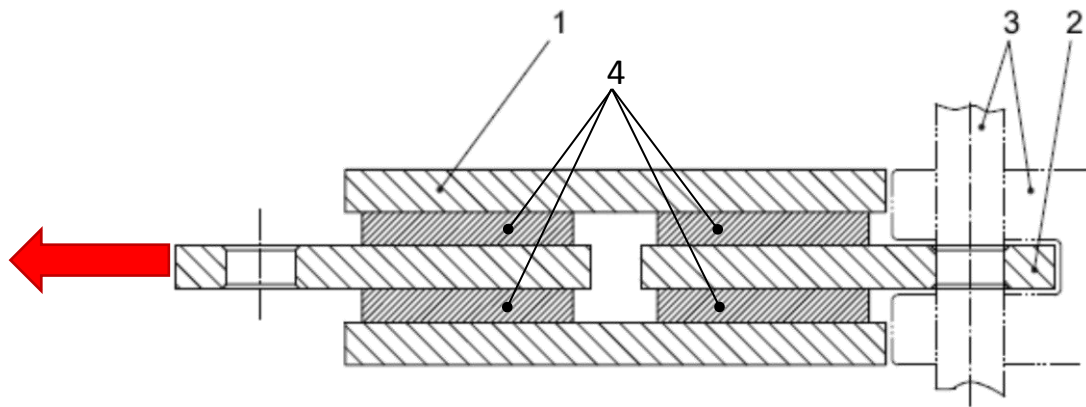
Sample holder for the shear modulus measurement, (1) – two external plates, (2) – two internal plates and (3) fixture for tensile loading, (4) samples [24]
